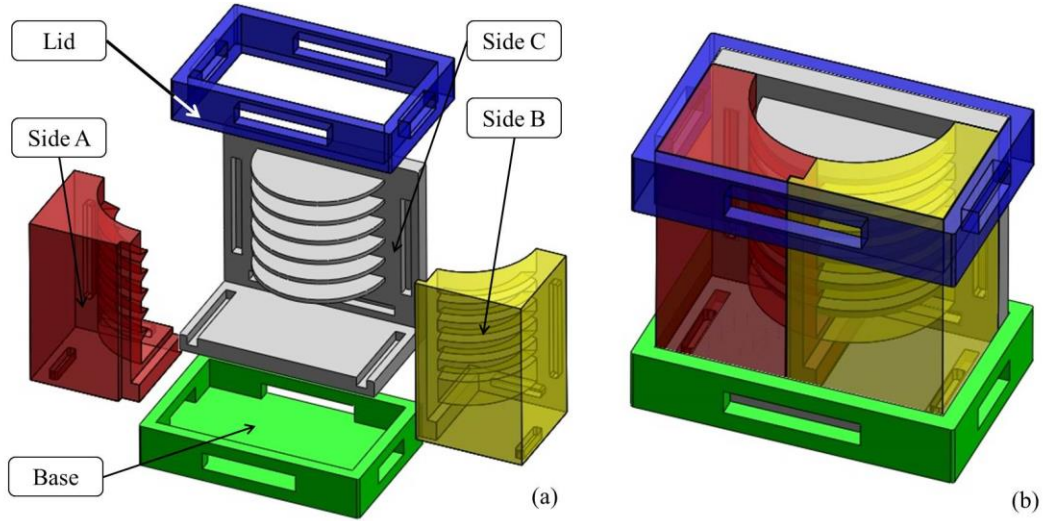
3D Model of Mold V2b for Extension Mechanism V2, (a) Exploded View; (b) Assembly
